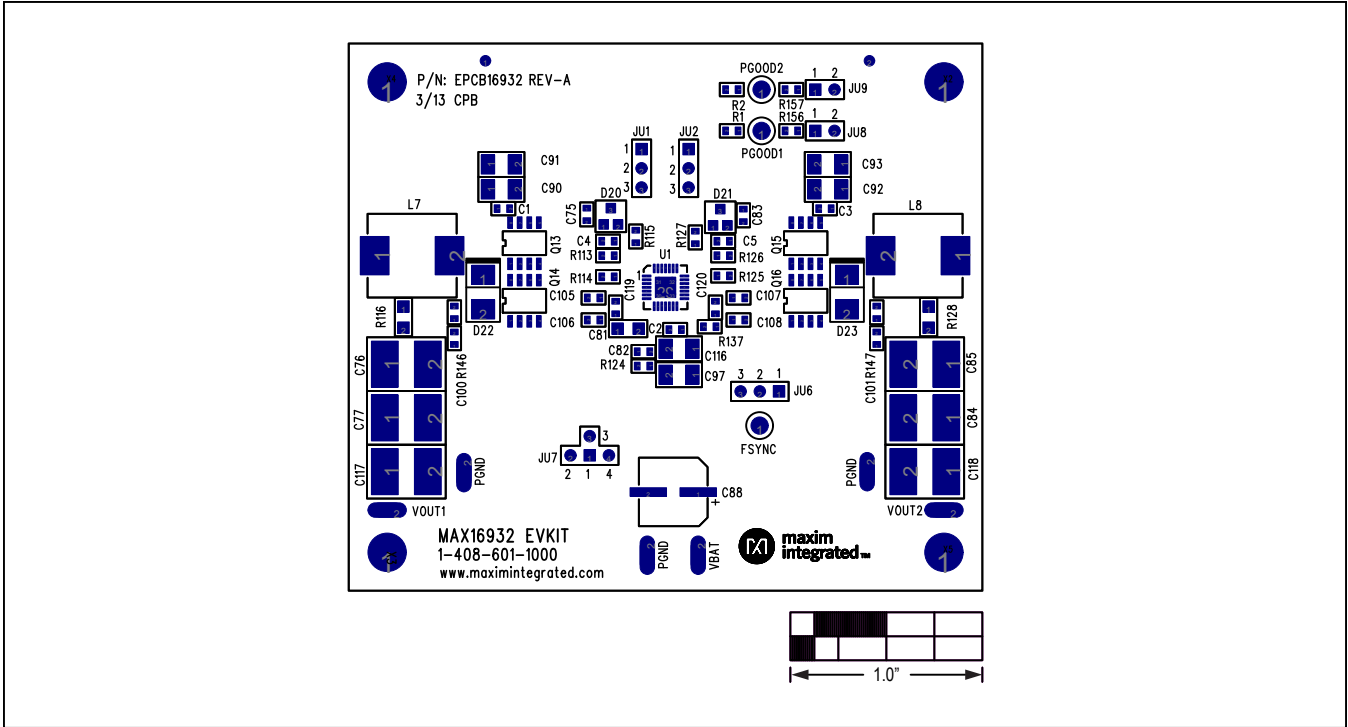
MAX16932 EV Kit PCB Layout—Solder Side
